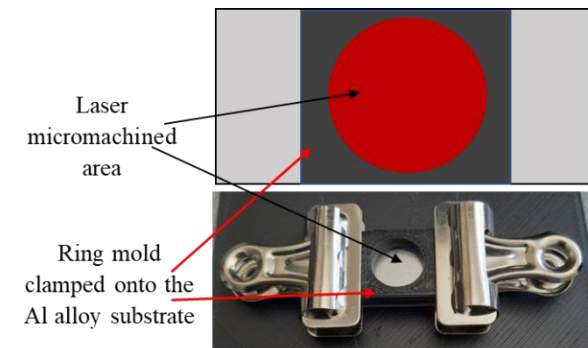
Illustration of a plastic ring mold clamped onto a laser-machined sample
